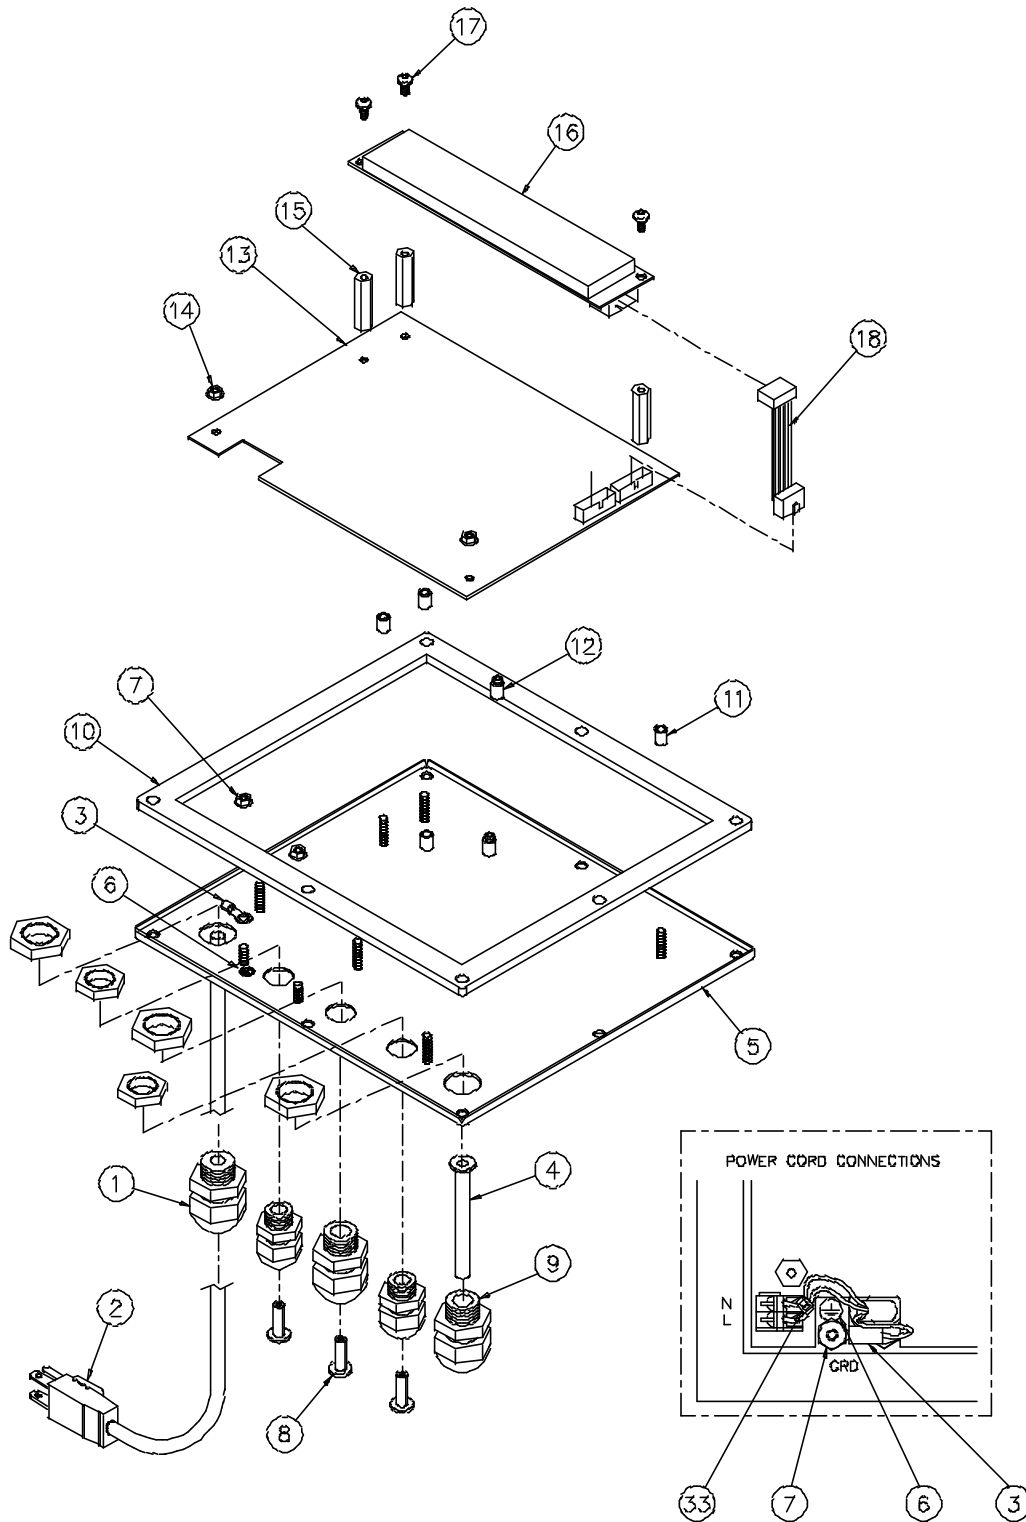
Exploded View 1 of M455 version (internal power supply) (Housing/Keypad/Lens)
